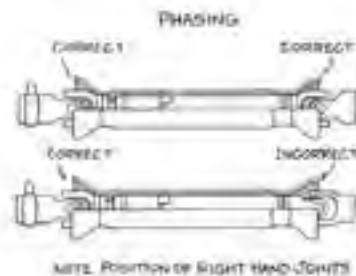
f. The upper portion of the drawing illustrates a correctly placed universal joint. You may wish to check the phasing on a PTO shaft. Illustration by Jeff Mathison
